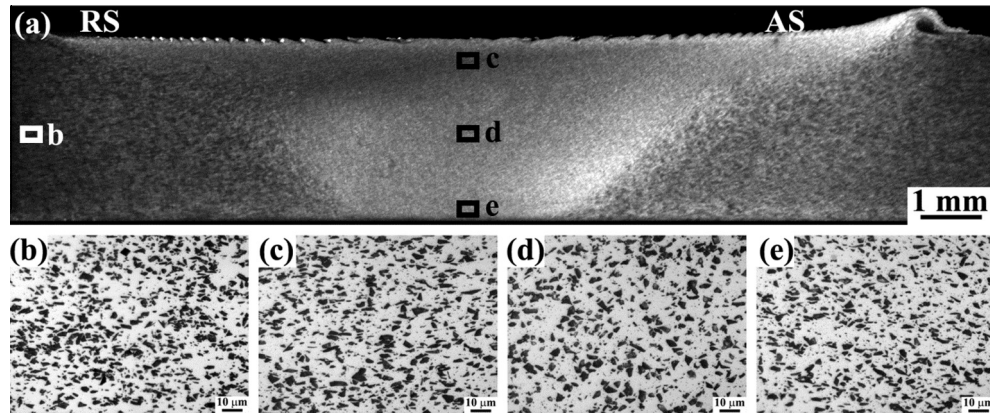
Optical images of R600: (a) macrograph of the weld, (b) base material, (c) top of nugget zone, (d) center of nugget zone, (e) bottom of nugget zone. The locations of (b)–(e) are shown in (a) (RS: retreating side and AS: advancing side).
